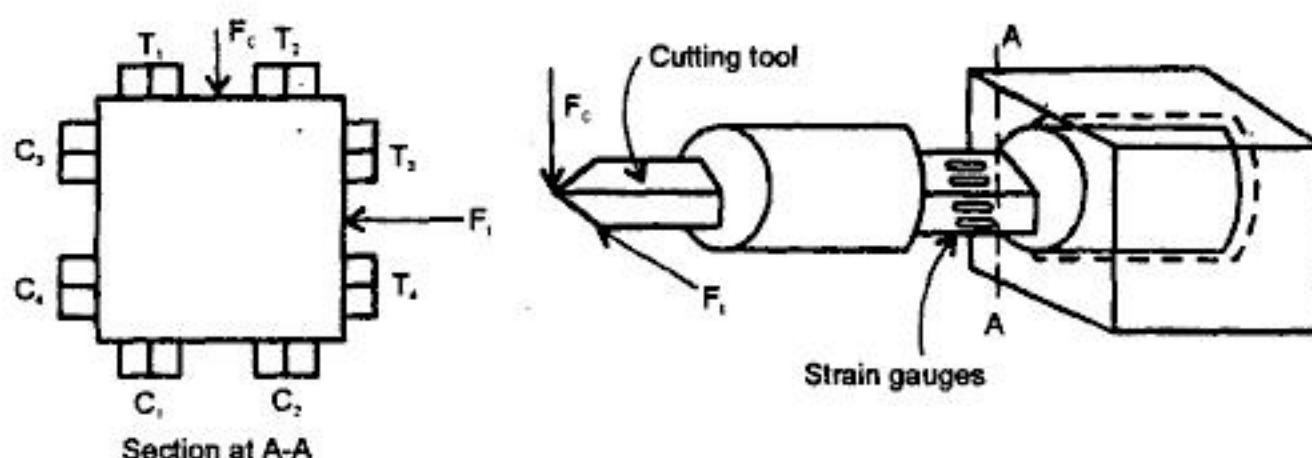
Use of strain gauges in a set up for two dimensional force measurement in turning on a lathe.
